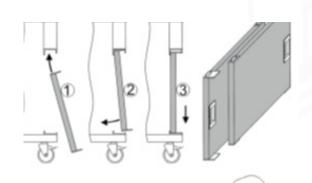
demonstrates the fitting of the cupboard doors; in this case, the rear door (Door A).
